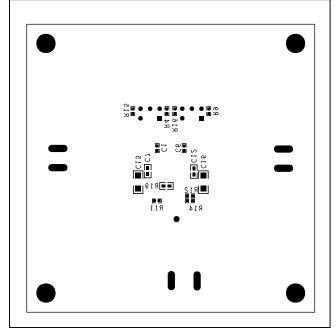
MAX17509 EV Kit Component Placement Guide—Solder Side
